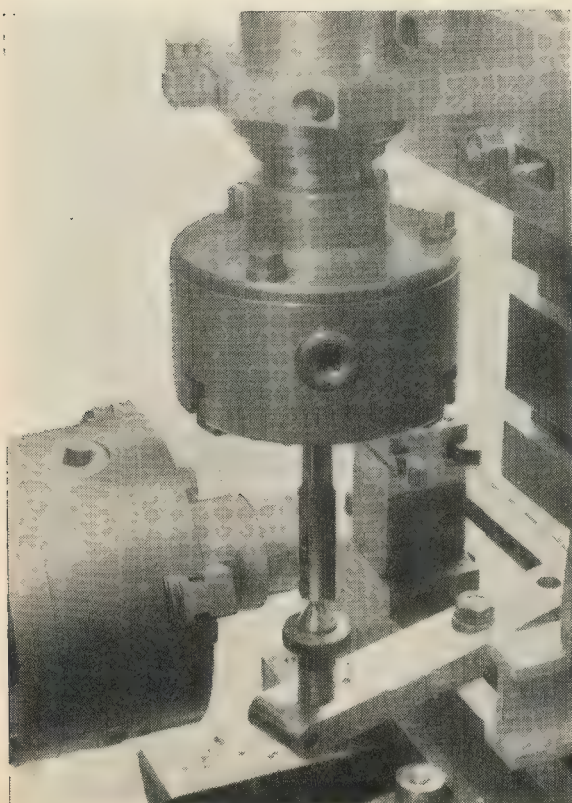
The blank mounted in the chuck and the tap driven by the millin attachment
